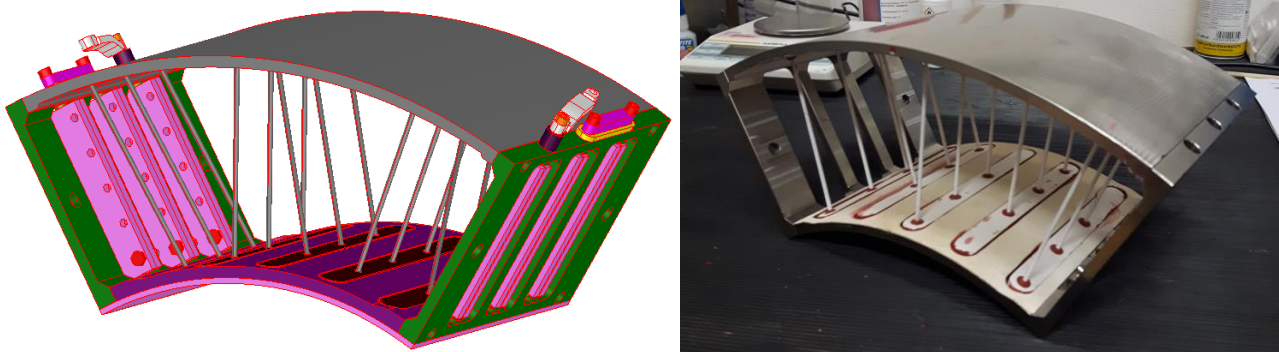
Circumferential traverse system by DLR in final CAD (left) and as manufactured part (right)
